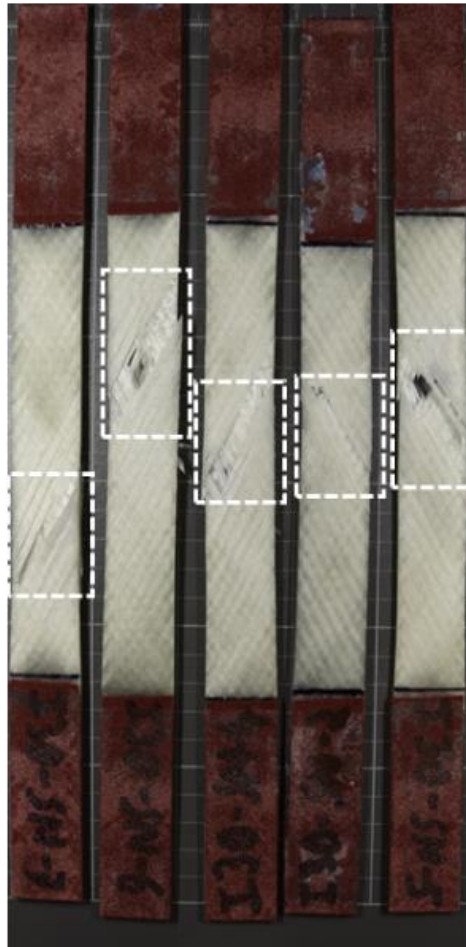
44 GF/Infugreen $\pm 30^\circ$ fatigue test specimens after failure with location of final failure indicated on the specimens.
